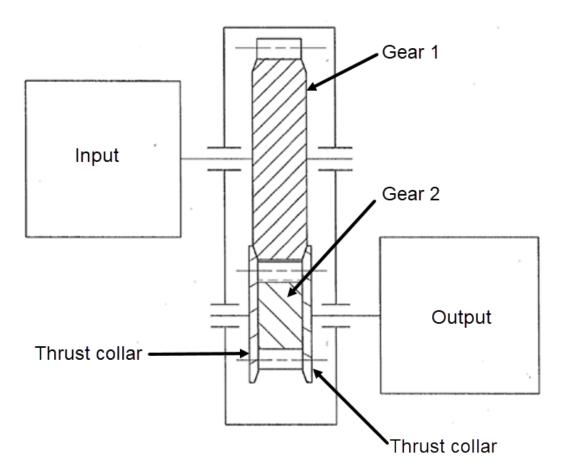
illustrates a pair of toothed spur gears (1) and (2) positioned relative to each other using left and right thrust collars attached to the surface of gear (2). The thrust collars are regarded as comprising specially adapted surfaces on the gears by which the two spur gears are positioned relative to one another.
